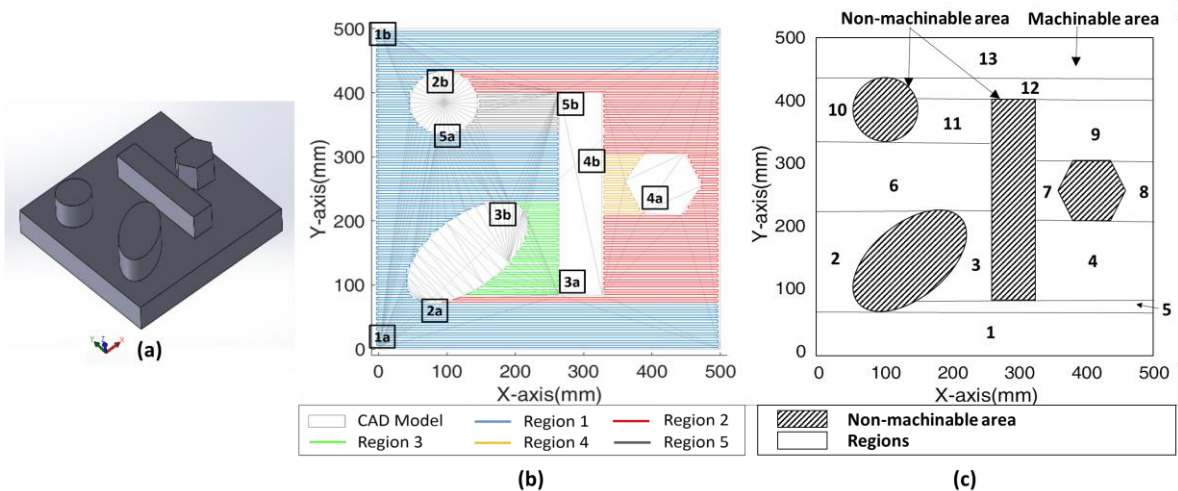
(a) CAD part model, Machining Area Segmentation: (b) Proposed approach, (c) Area Decomposition [18].
